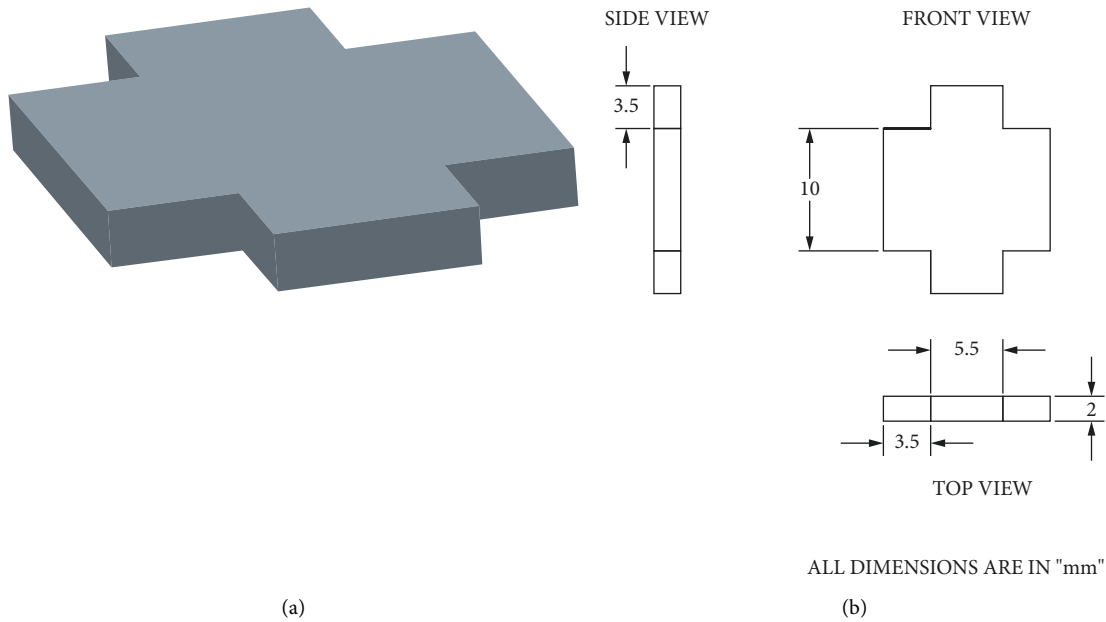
(a) Component 3D model and (b) detail 2D drawing.
